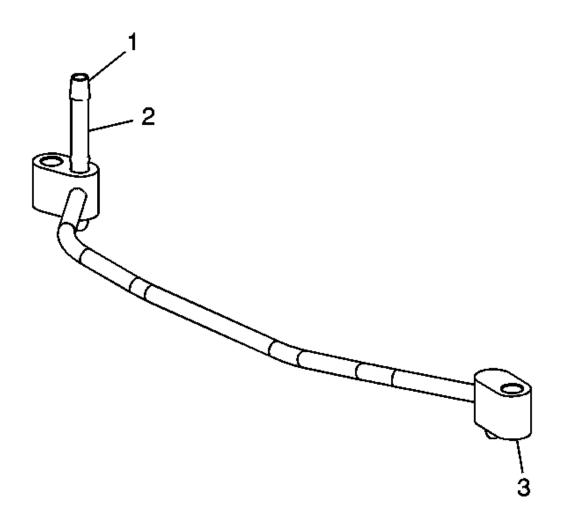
View Of Coolant Air Bleed Pipe Components Courtesy of GENERAL MOTORS CORP.
